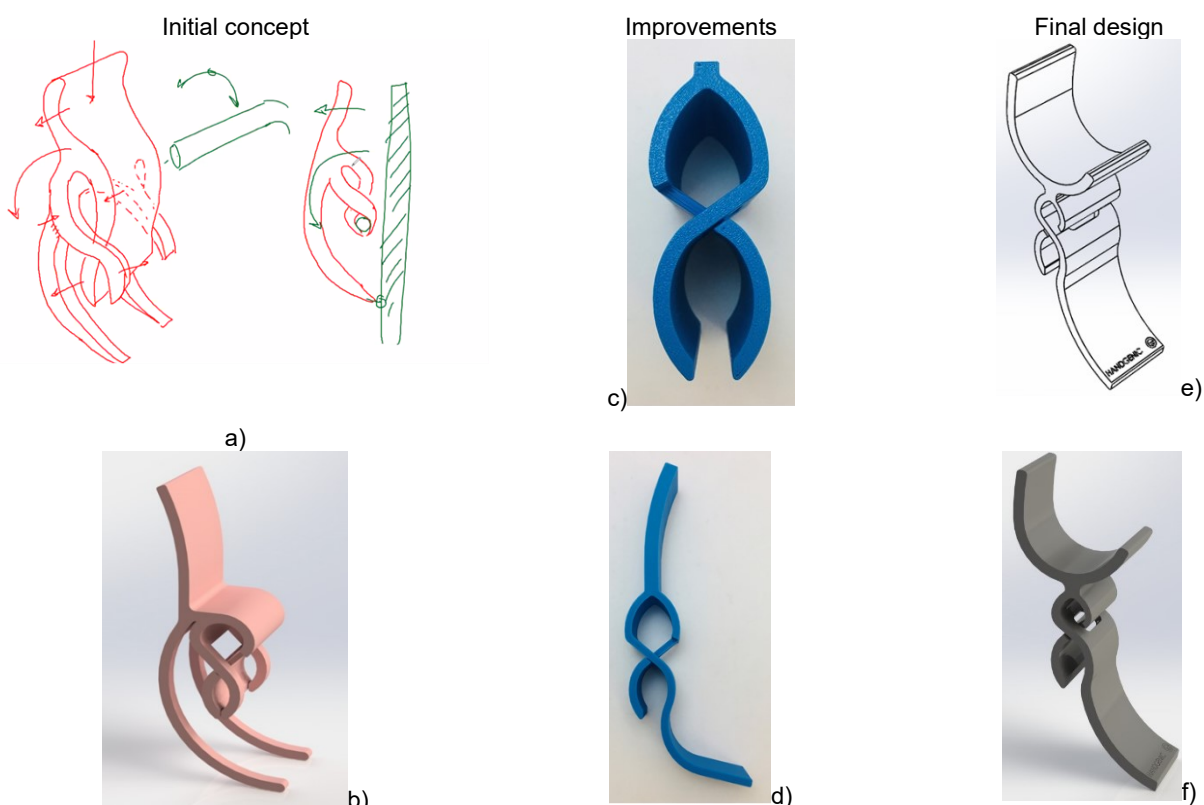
Handgenic development: a) initial sketch; b) initial design based on the first sketch; c) improvement of the tweezer mechanism to fit 20mm diameter doorknobs; d) new design with lever mechanism integrated in the tweezer; e, f) final design with improved ergonomics to fit the arm when opening the door
